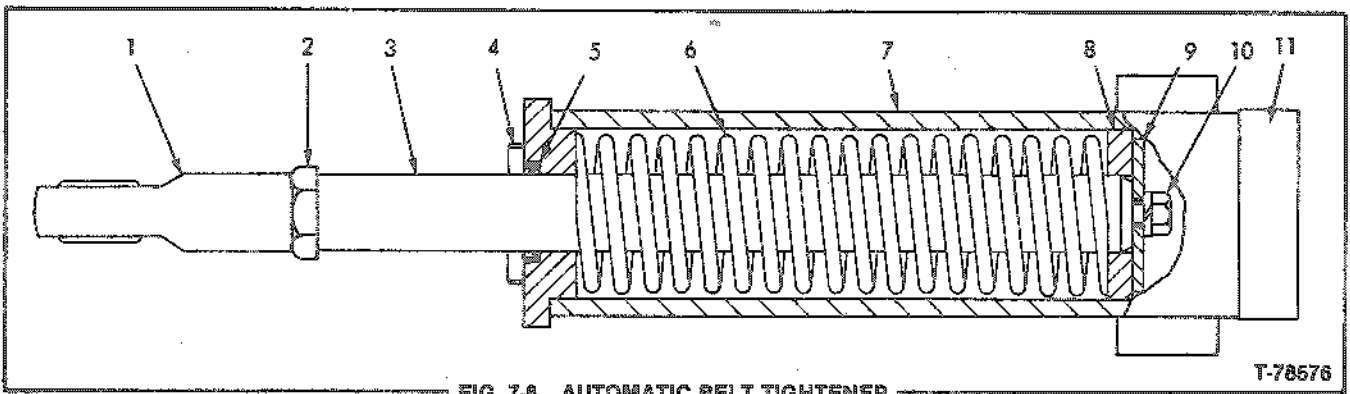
AUTOMATIC BELT TIGHTENER
